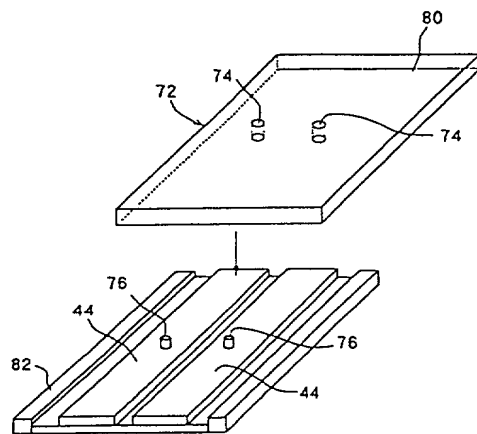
is a perspective view of a frame assembly in an exploded view, showing a frame (72, 74, 80) and a base (44, 76, 82).
